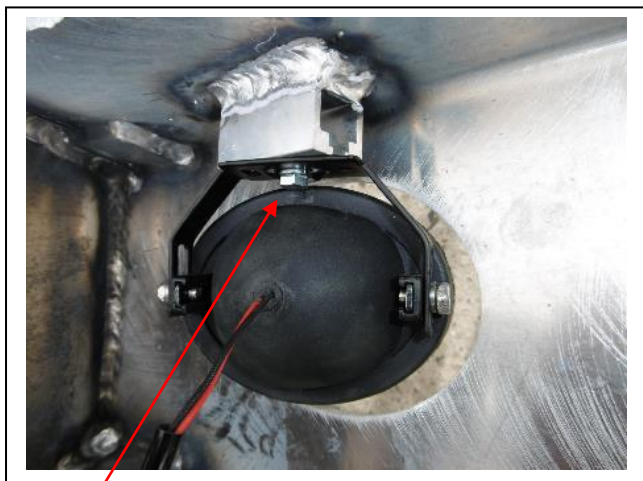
Install M8 nuts to rear of bolts too chassis rails. Tighten bolts before tightening nuts.
